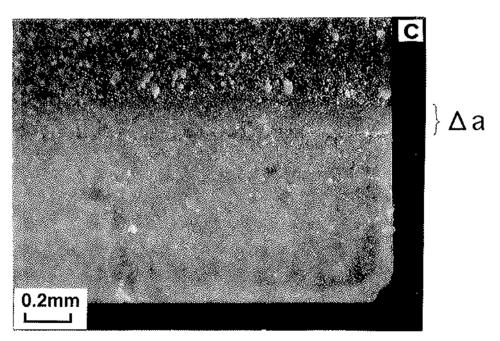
Fracture Surfaces of SEPB Specimens.
